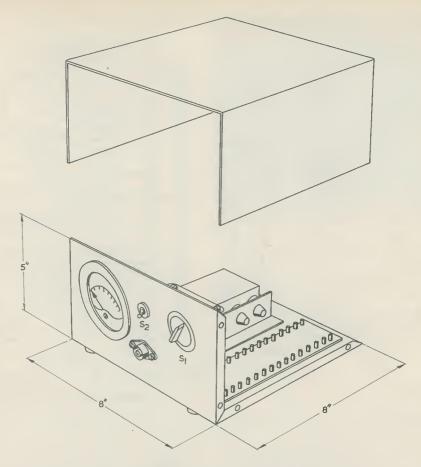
Another view of the prototype, giving outside chassis dimensions
